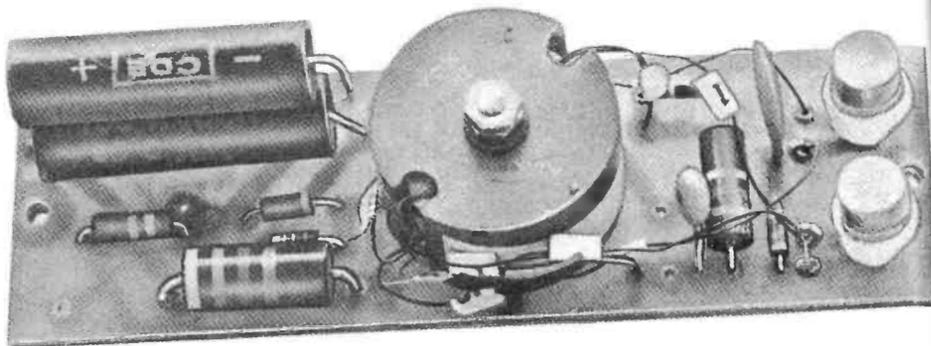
Wired pc board assembly shows T1 mounted with hardware fiber washer. C4 is on top of C3.
